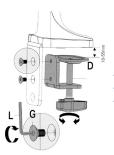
Attach Clamp Mechanism (D) to Angled Bracket (C).
